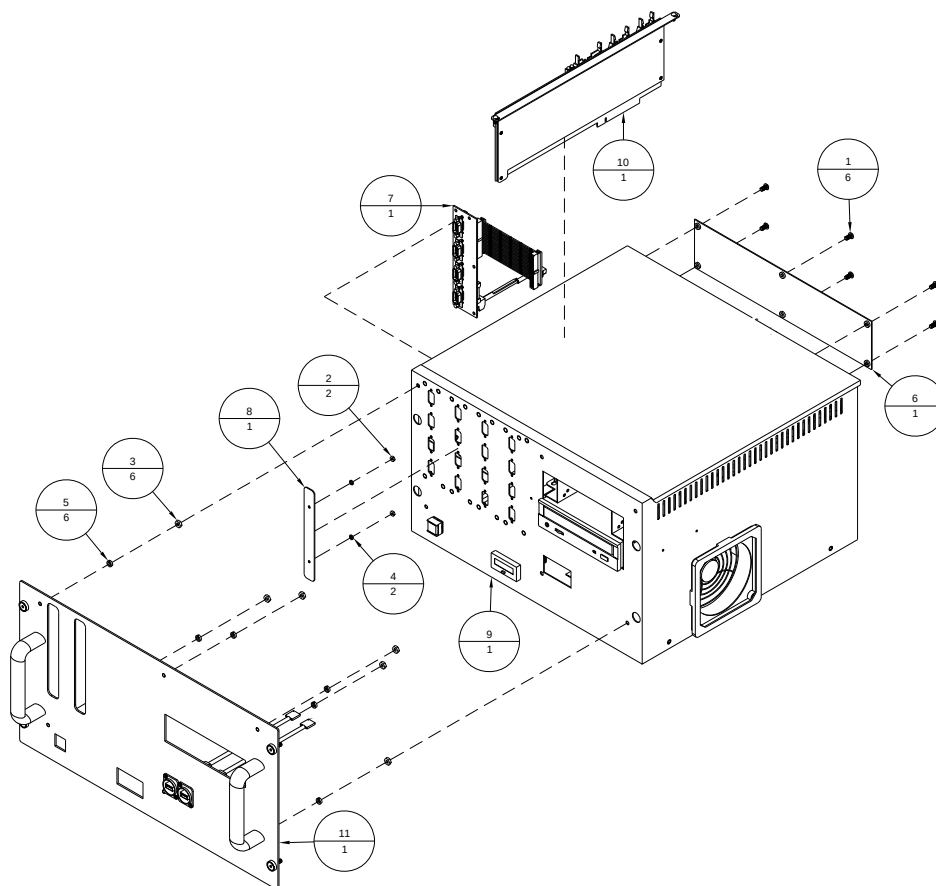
BK-PCM-8 – Module, Computer Assembly, Universal
